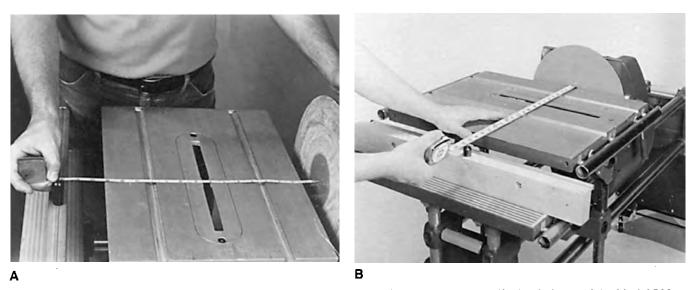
To pivot sand extra-large circular workpieces, mount the lathe cup center to: (A) the rip fence of the Model 500 or (B) a rip fence extension on the Model 510.
